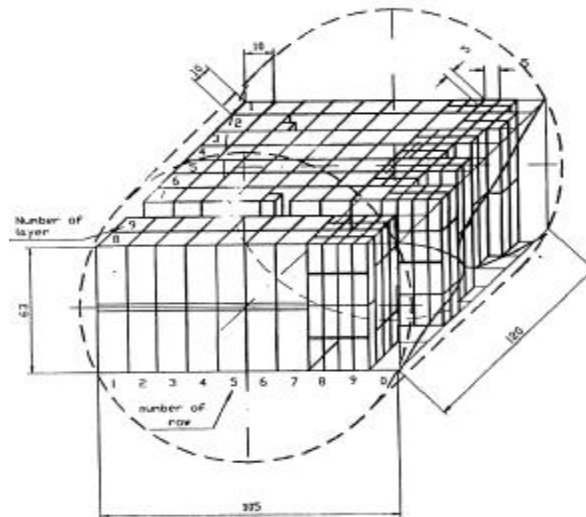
Typical scheme of the trepan cutting by EDM machine – up to 10 standard Charpy specimens have been manufactured from the disk 120 mm in diameter
